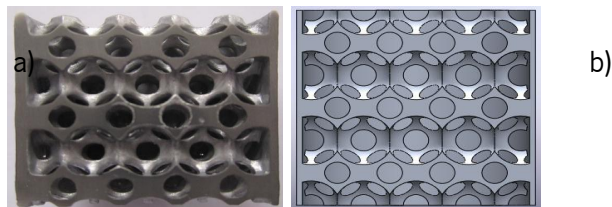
Model of the aluminum foam of uniform cells: a) Real b) CAD
